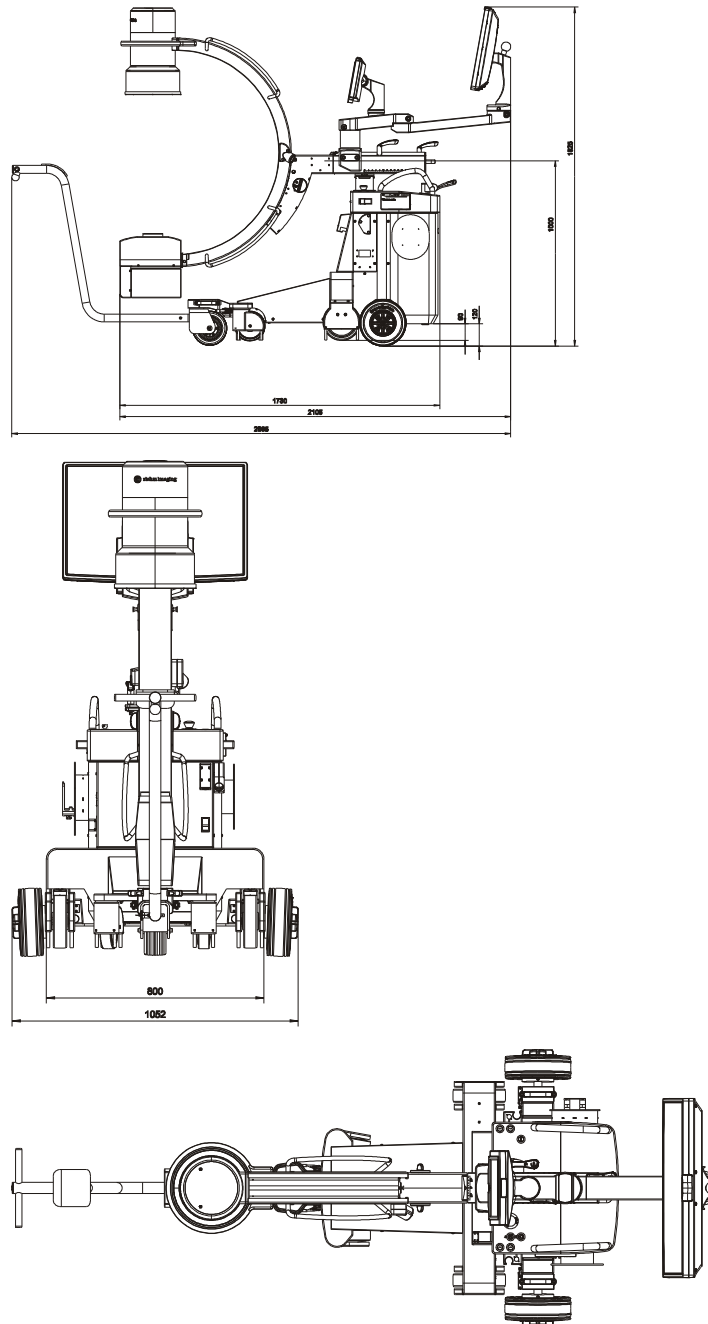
Dimensions of Ziehm Solo Option Portable M2 mobile stand with transport wheels
